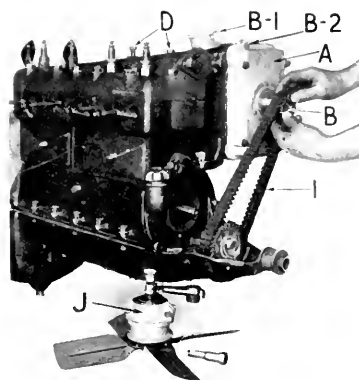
FORD ENGINE WITH CRANK SHAFT AND CHAIN IN PLACE
